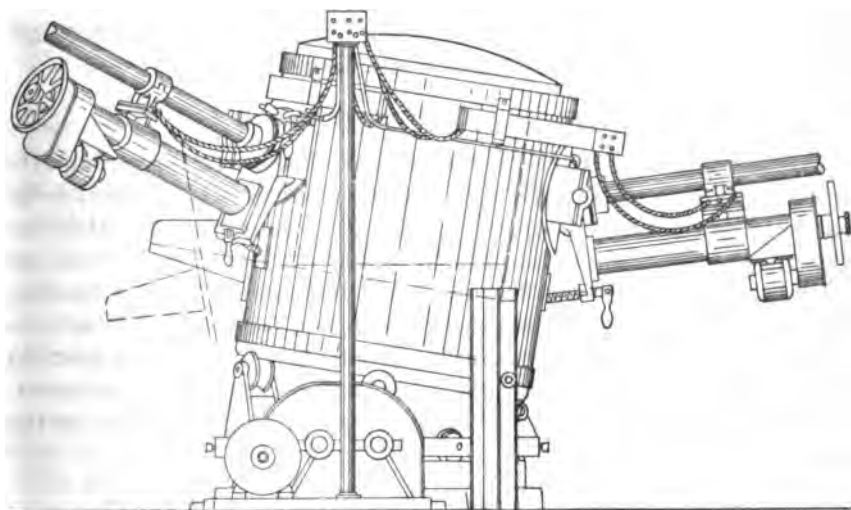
Gyrrating Stassano-type furnace sold by Volta Manufacturing Co.
